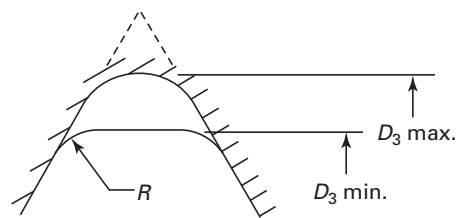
Major Diameter, Internal Thread (Rounded Form)
